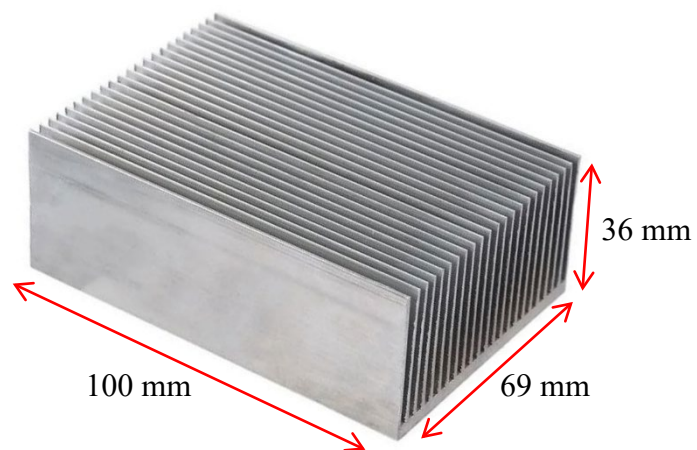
Aluminium Heat Sink With 36 mm Fins.
